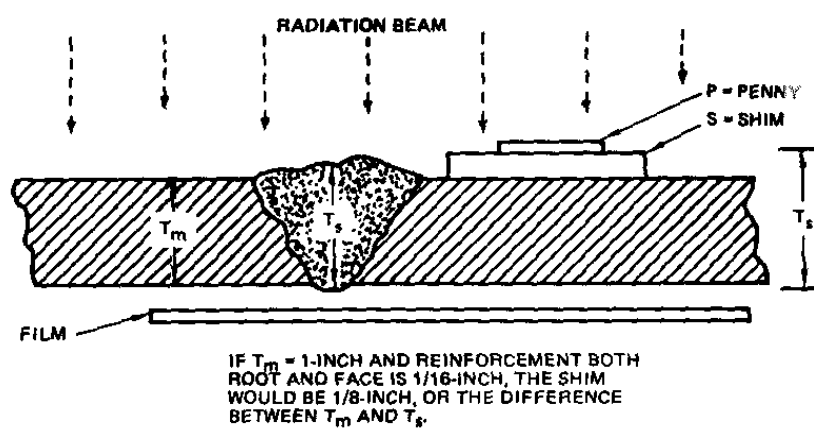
Single Wall Exposure/Single Wall Viewing
